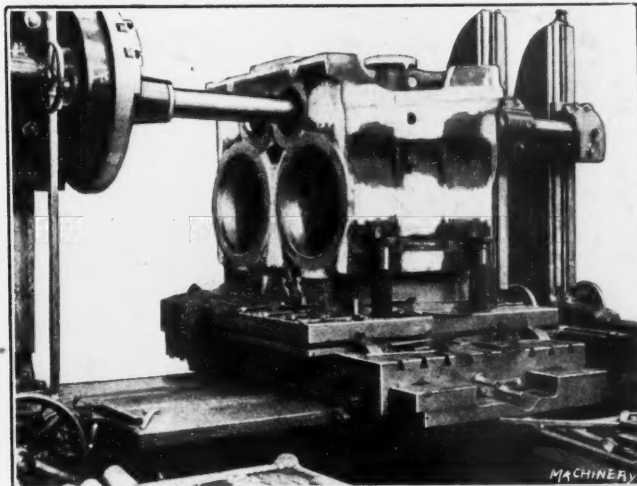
Boring Valve Lines in 20-inch Diameter by 26-inch Stroke Inside-admission Cylinders
